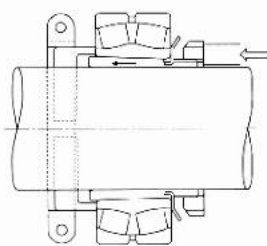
Removal of Adapter with Stop and Axial Pressure
